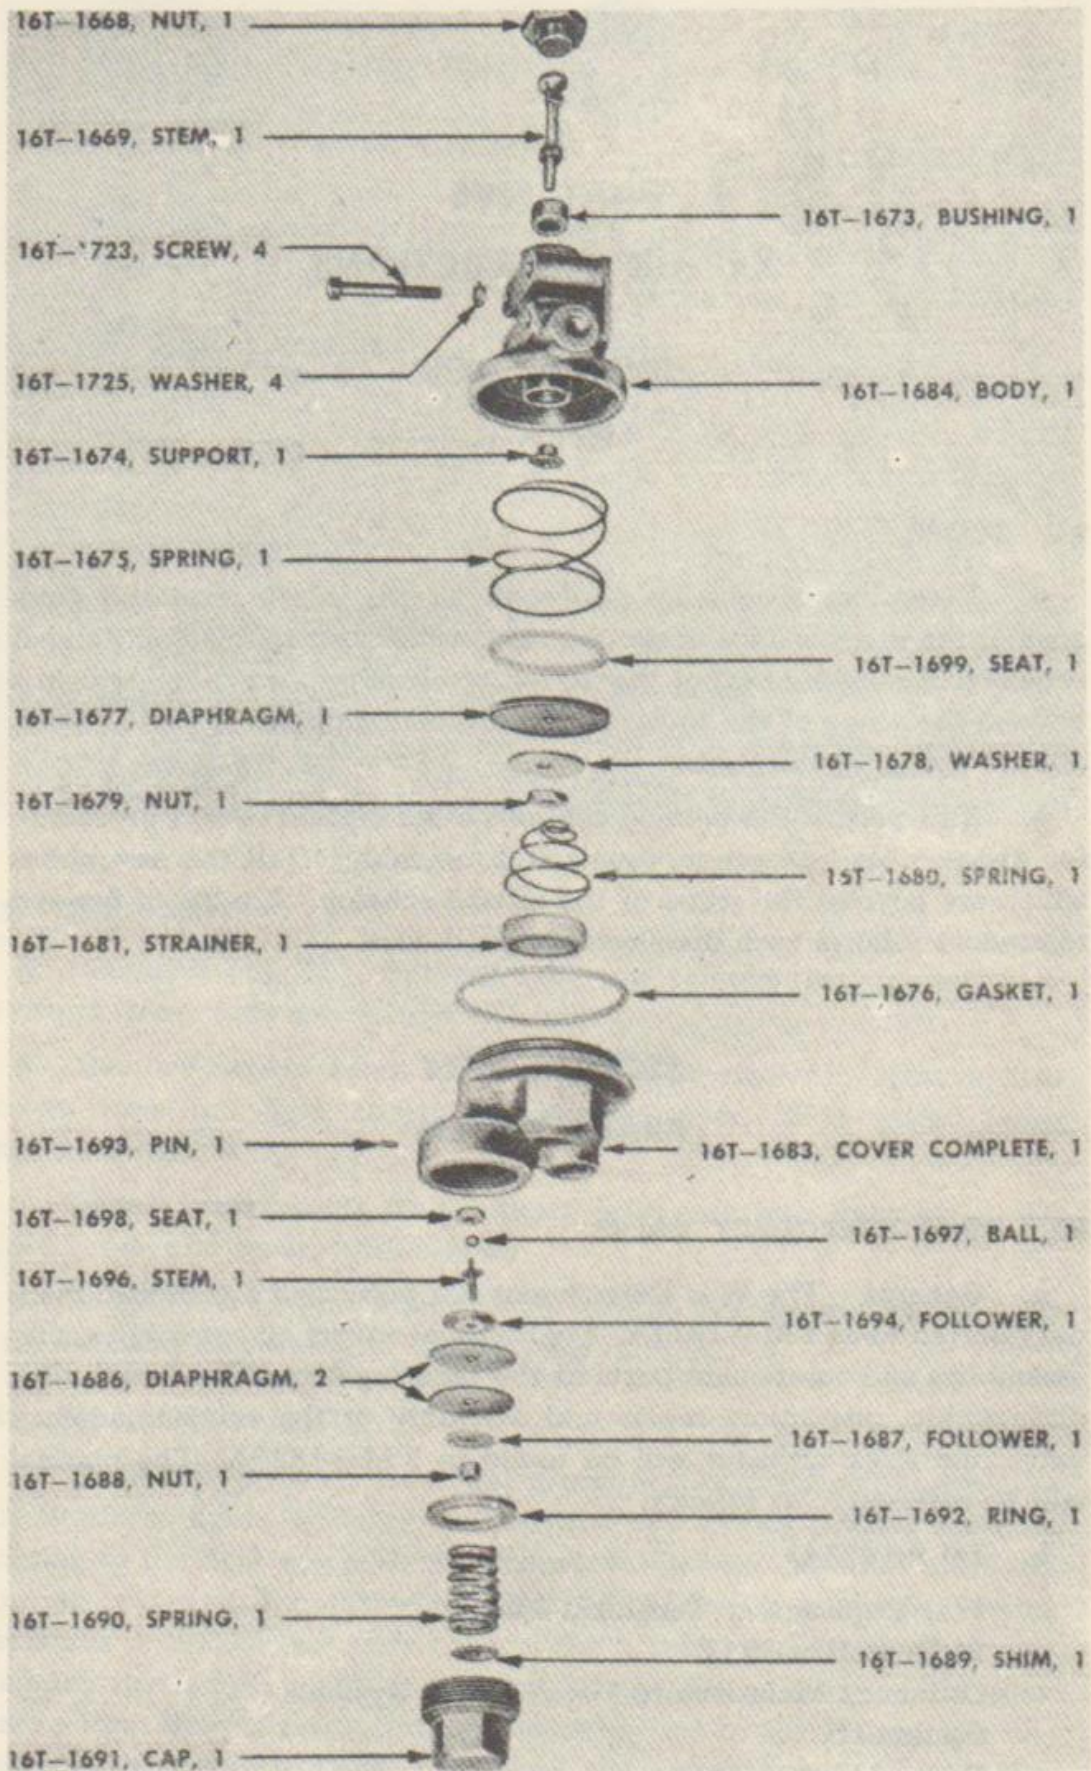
RELAY-EMERGENCY VALVE—EXPLODED VIEW
